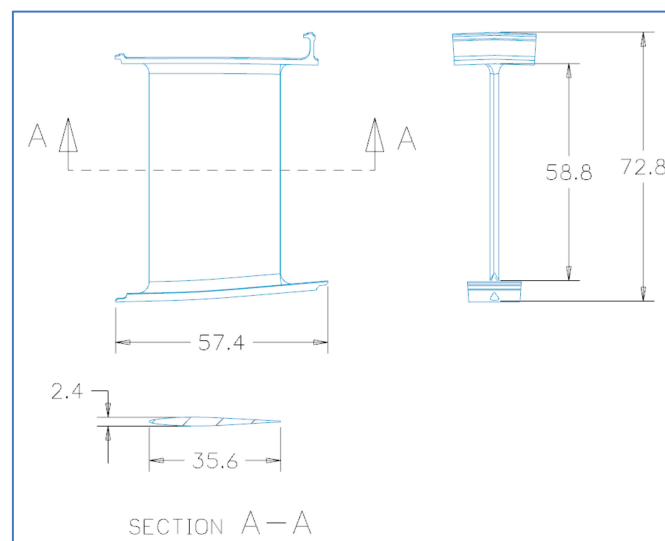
General dimensions of airfoil geometry. Dimensions are in mm.
